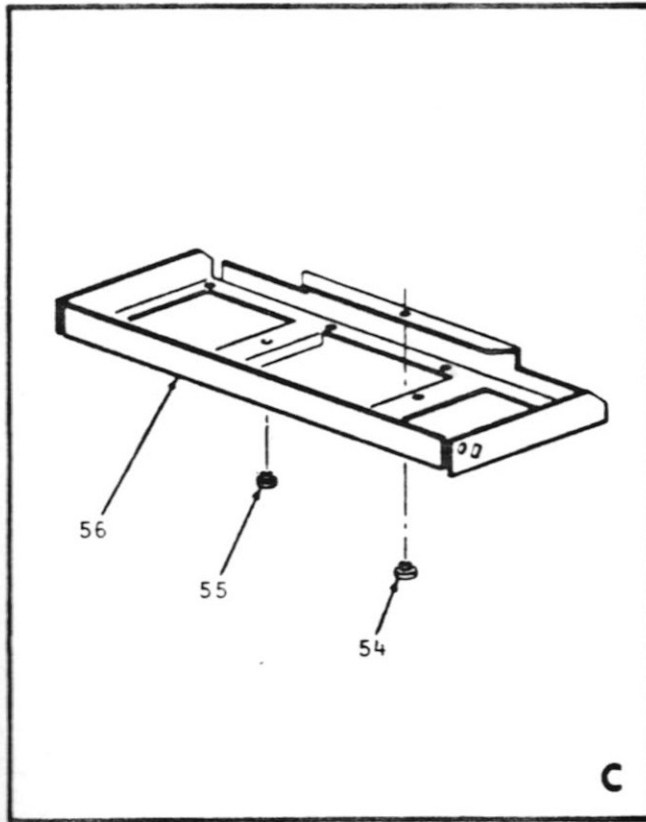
DPAV Exploded View (Sheet 1 of 5)
